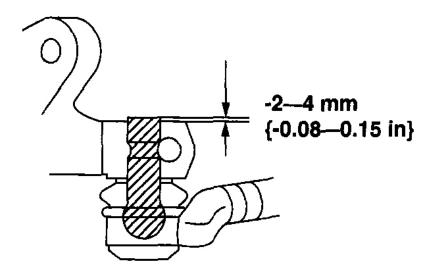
Installing Dust Boot To Ball Joint Using SST Courtesy of MAZDA MOTORS CORP.
